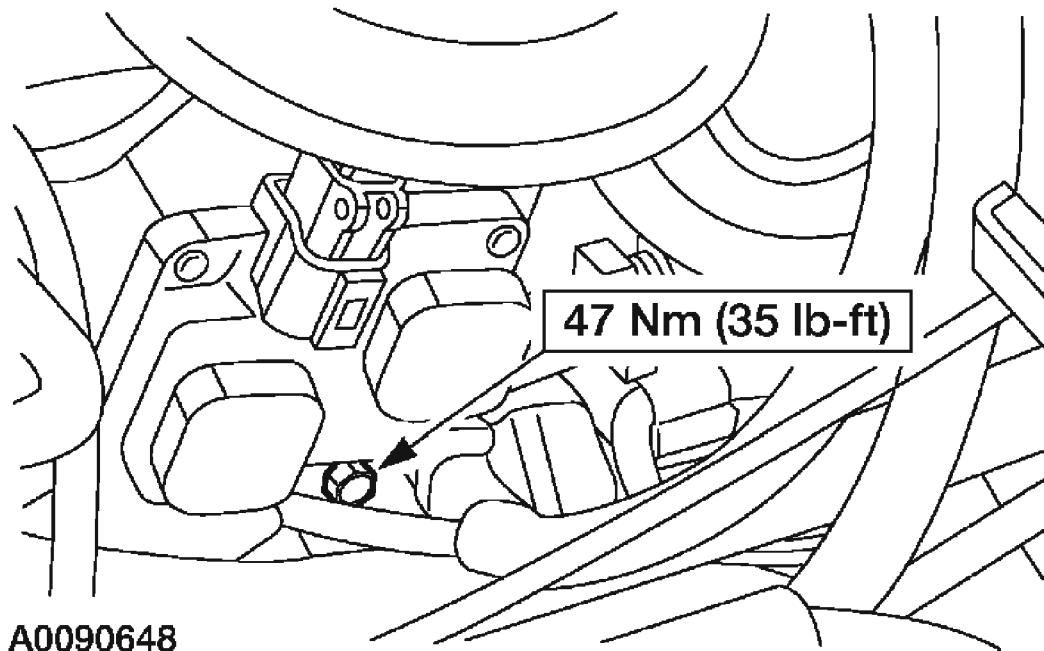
Removing Engine Ground Cable Bolt And Ground Cable
